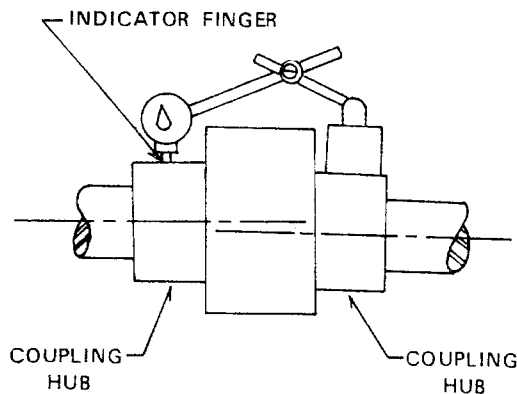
TESTING PARALLEL ALIGNMENT OF MOTOR AND GENERATOR SHAFTS FOLLOWING COUPLING INSTALLATION
